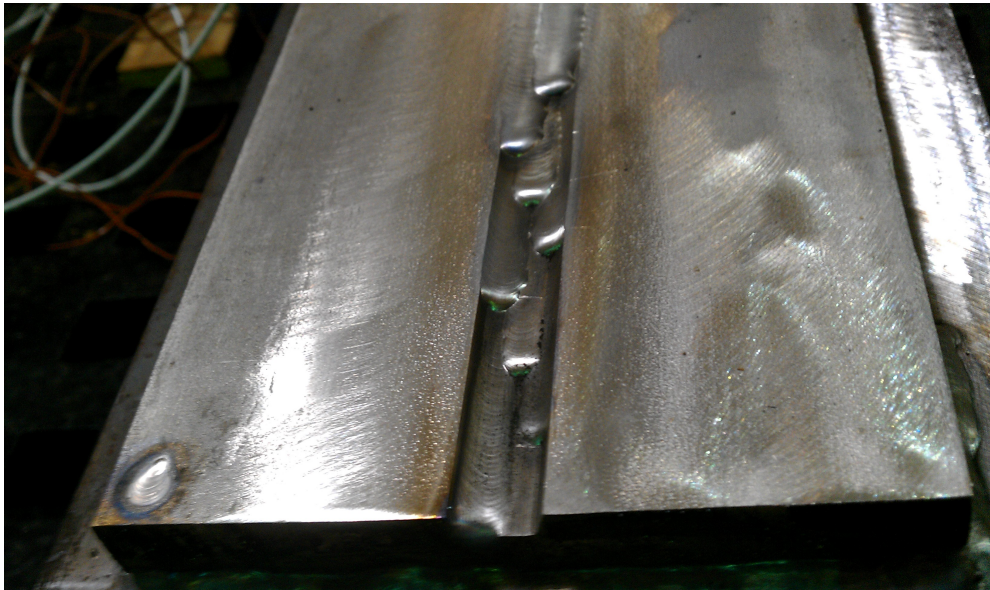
“Staggered” weld to determine weld bead geometry evolution with each weld pass
